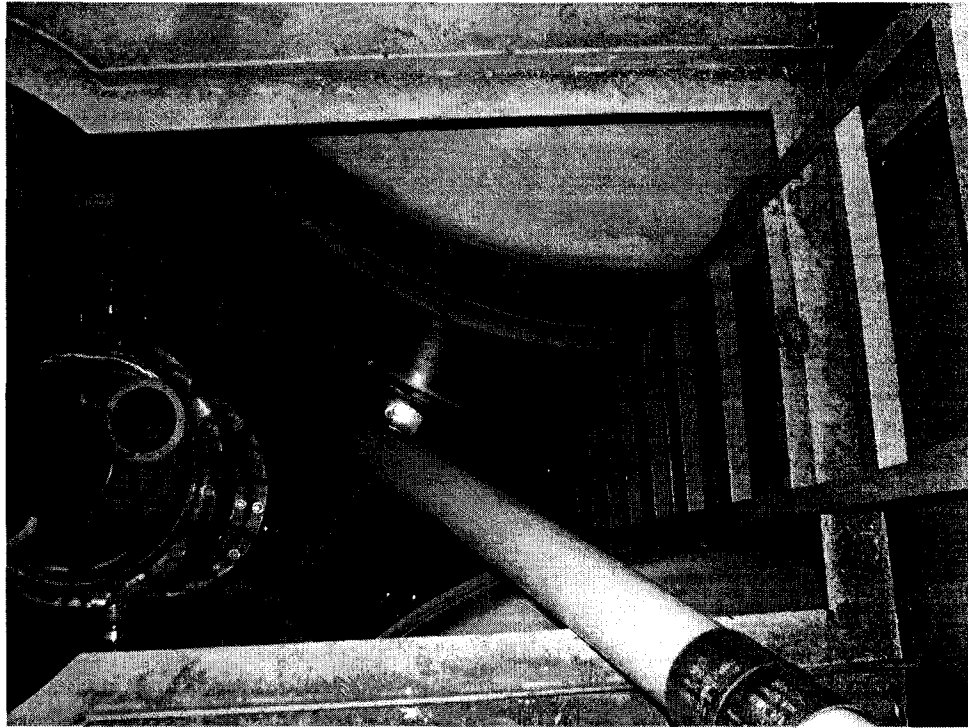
Key shaped hole for access to lower sections of buoy. Ladder, silos, flex-augers, and mixing chamber are visible installed in the buoy.
